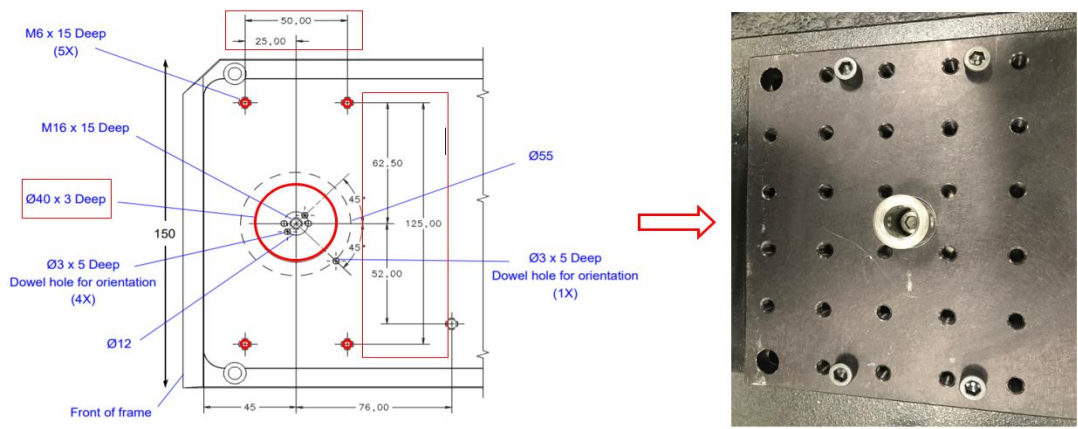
Breadboard Adjustment [27] © Illinois Tool Works Inc.
